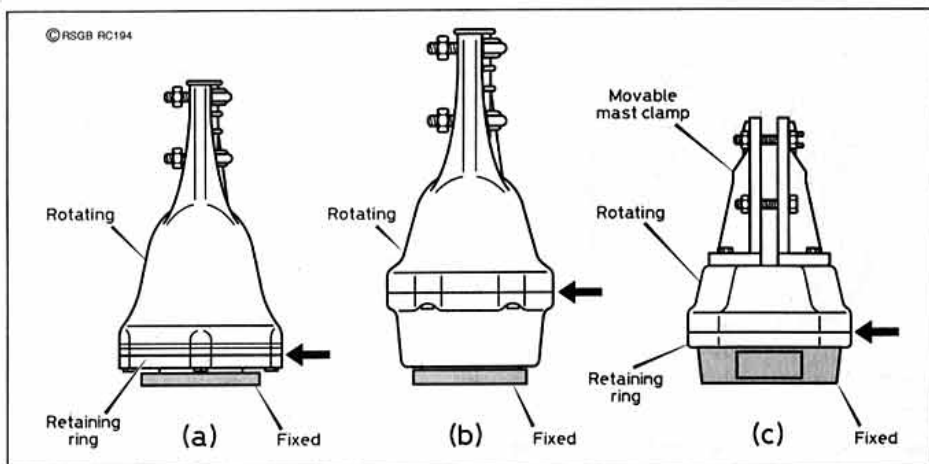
Three types of rotators: the non-rotating part is shaded, and the arrowhead shows where the rotating part is joined. (a) Smaller CDE, (b) Larger CDE, (c) Most other makes.
